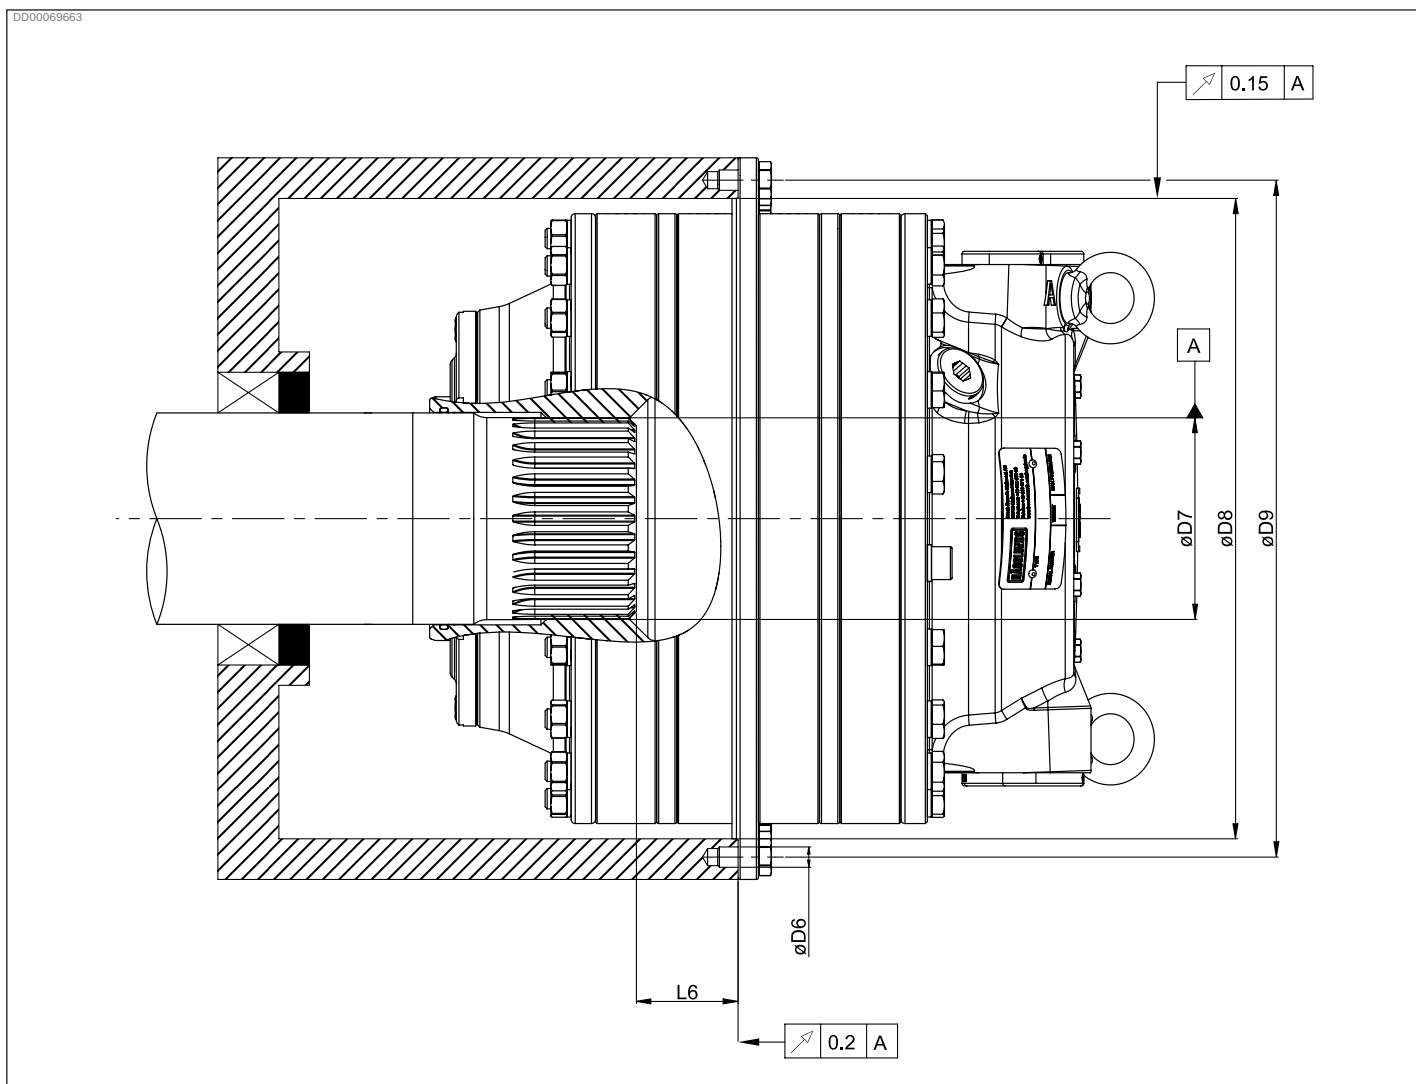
Shaft installation tolerances CAB 30 - CAB 40
